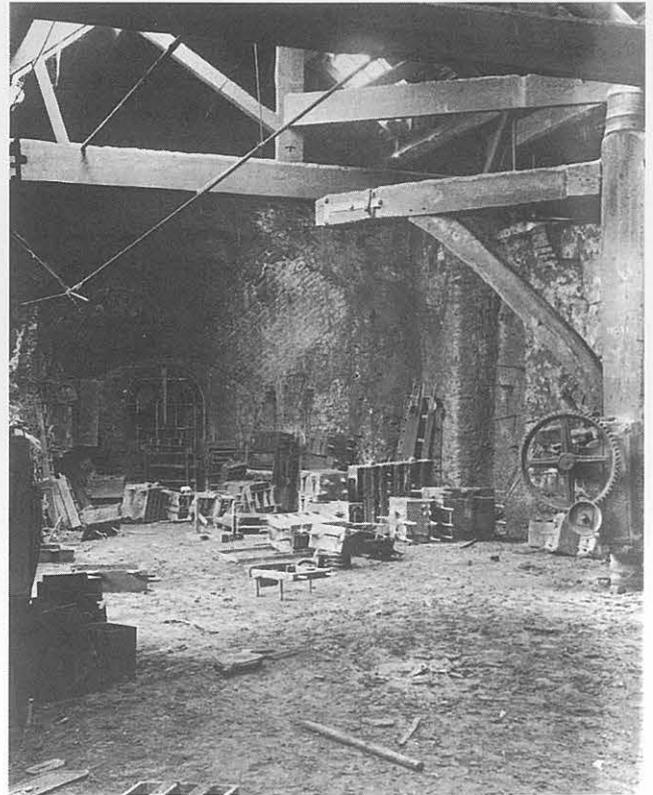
A late 19th-century view of a workshop on the east side of the Upper Works, looking north to the snapper furnace. The wall on the right side is the retaining wall in front of the snapper furnace. (Ironbridge Gorge Museum Trust)
